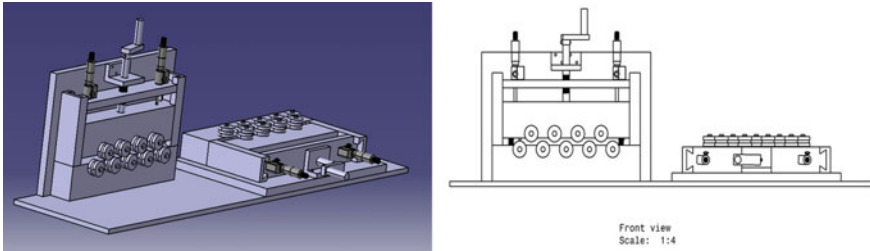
A 3D model of wire rope straightener with micrometer screw gauges
